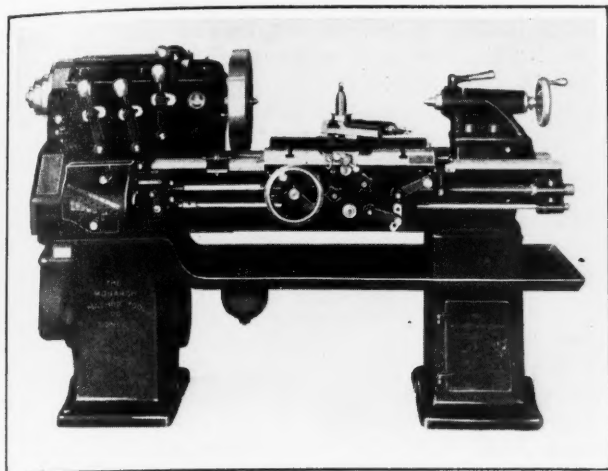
Monarch Lathe with Helical-gear Ball-bearing Headstock
